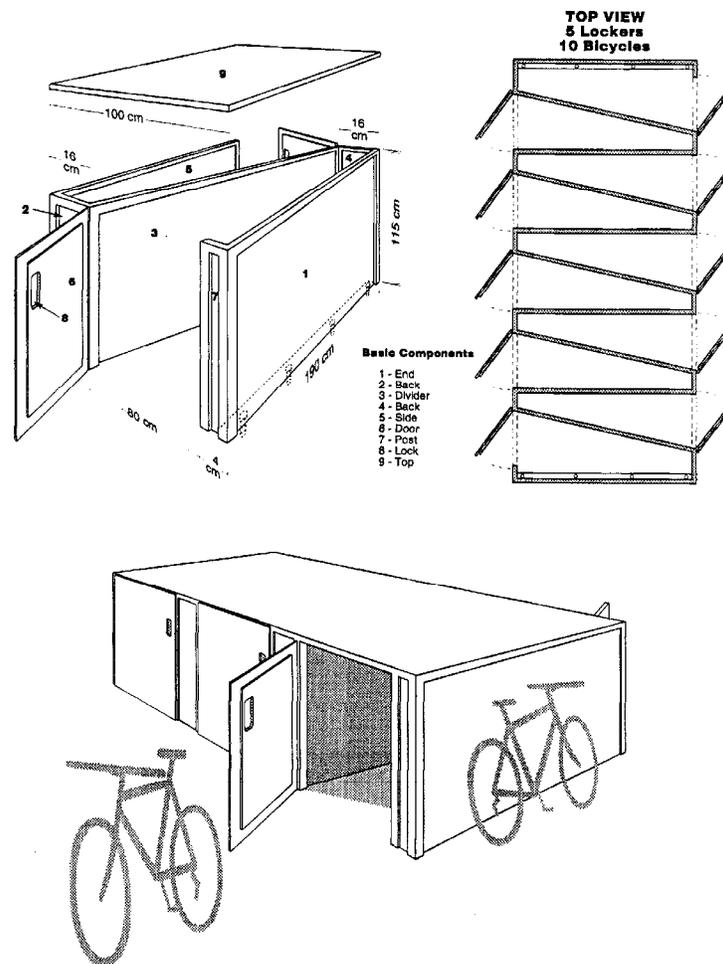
Recommended Long-Term Bicycle Parking Facilities
